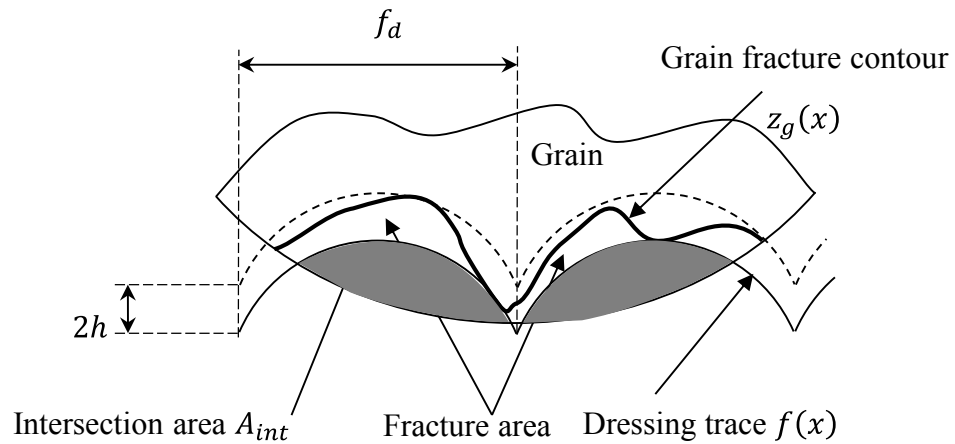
Cutting edges generated by dressing fracture [11].
